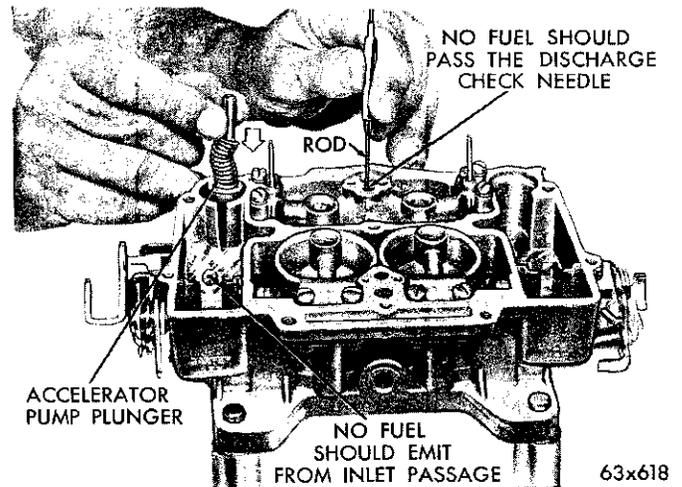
Testing the Accelerator Pump Check Ball and Discharge Needle
